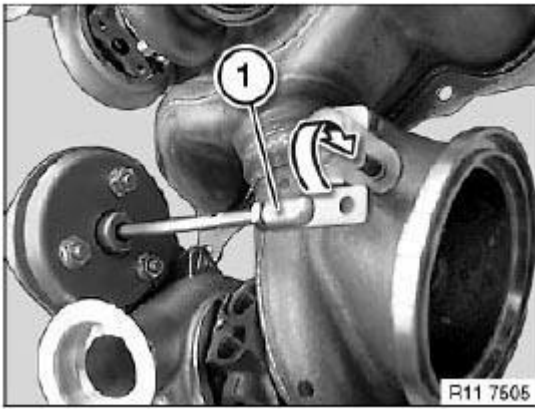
Engaging Turnbuckle On Adjusting Lever
